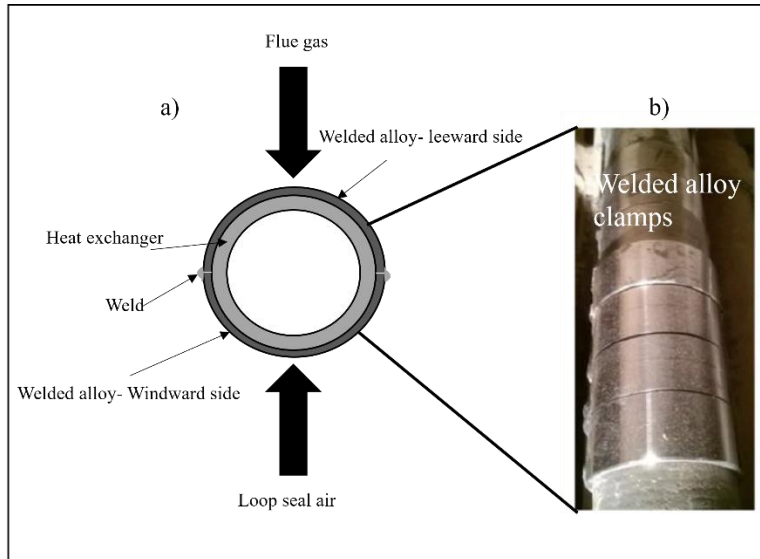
Schematic and photograph of: a) the welded areas of the loop seal FBHE; and b) samples clamped onto the FBHE bundle.
